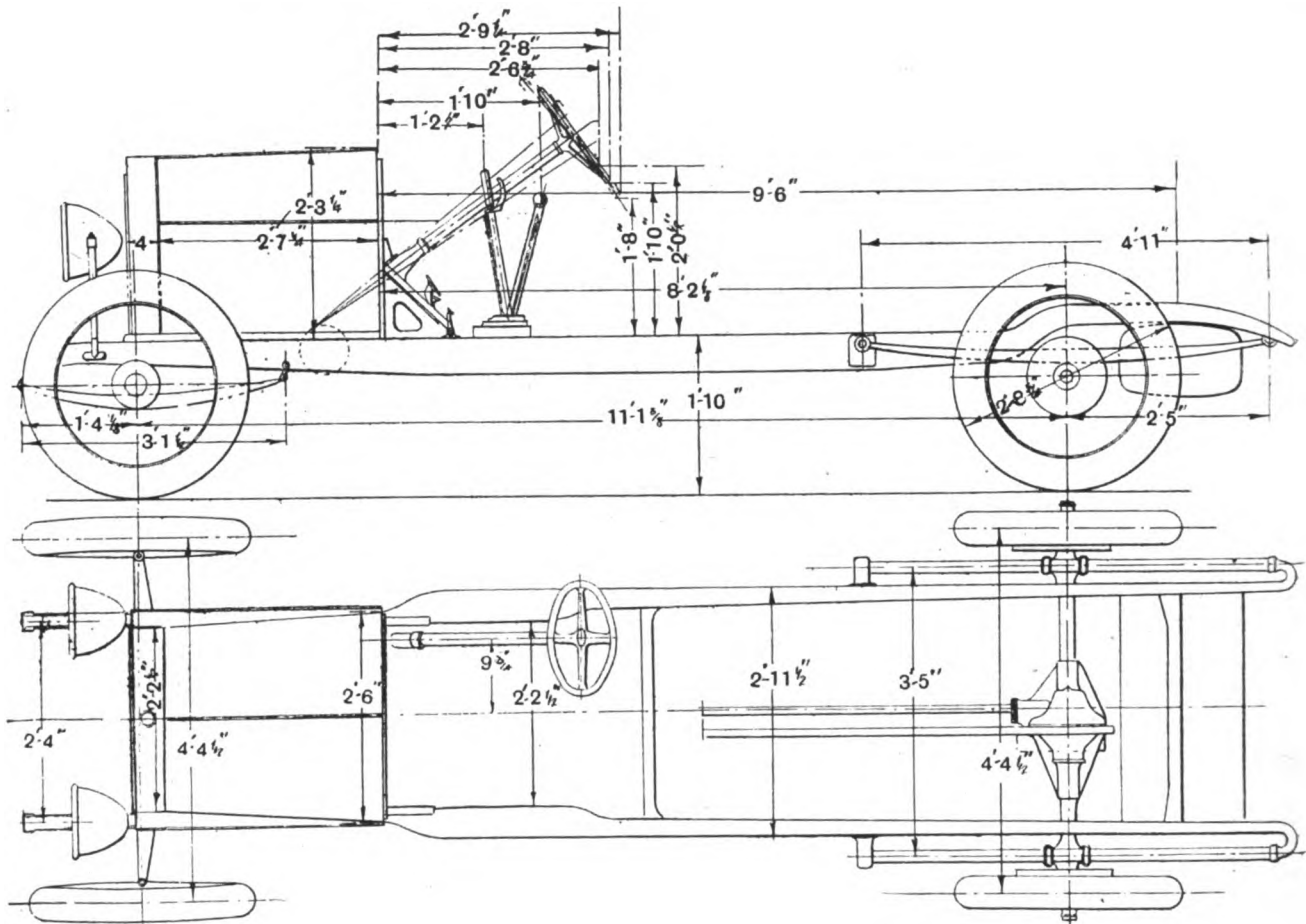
Body builders' drawing of the Lancia 35 h.p. chassis showing the principal needed dimensions.
